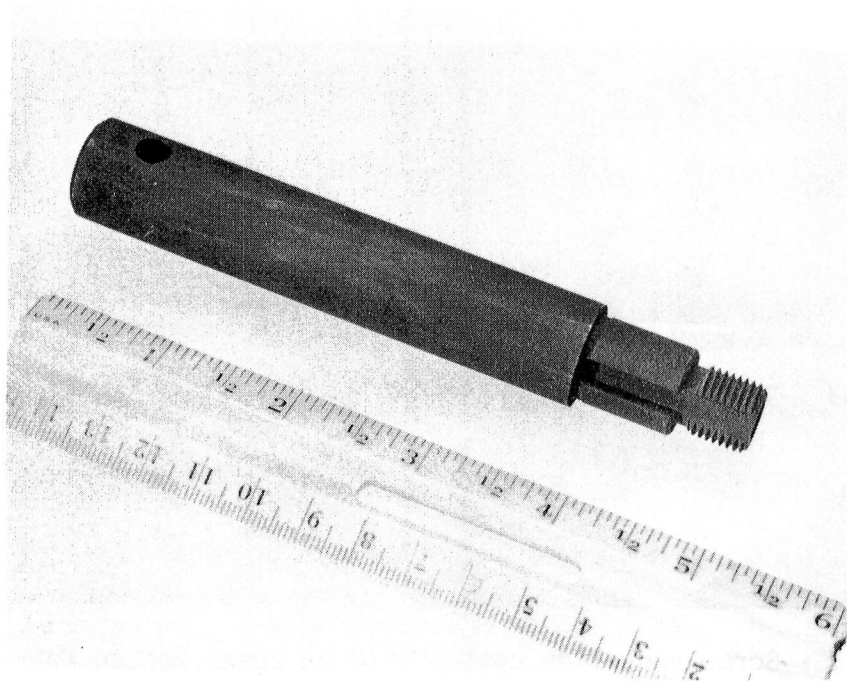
Hand crank operated shaft coated with a phenolic bonded MoS₂ film.
